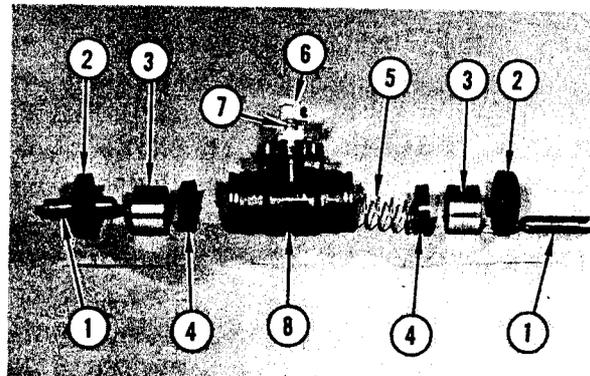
WHEEL CYLINDER ASSEMBLY
